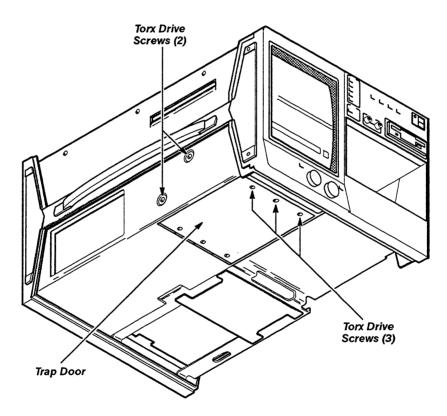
Removing/Replacing the Trap Door Torx Drive Screws
